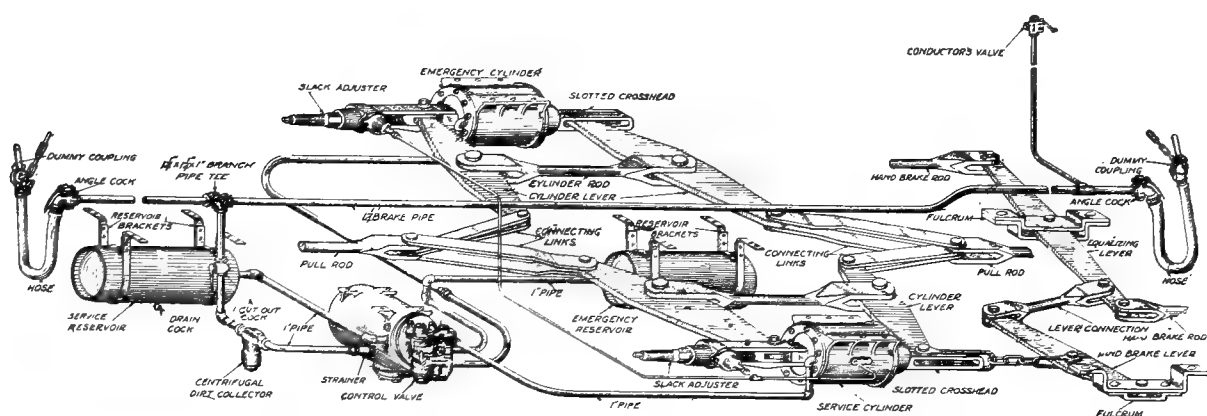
P C Passenger Brake Equipment with Cylinders Pointing in the Same Direction.
